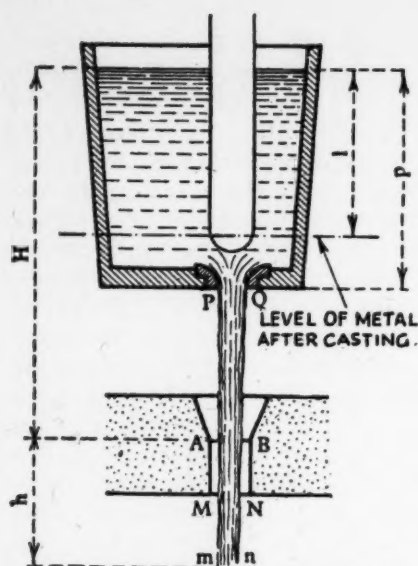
Direct filling of a mold from a bottom-pouring ladle.
